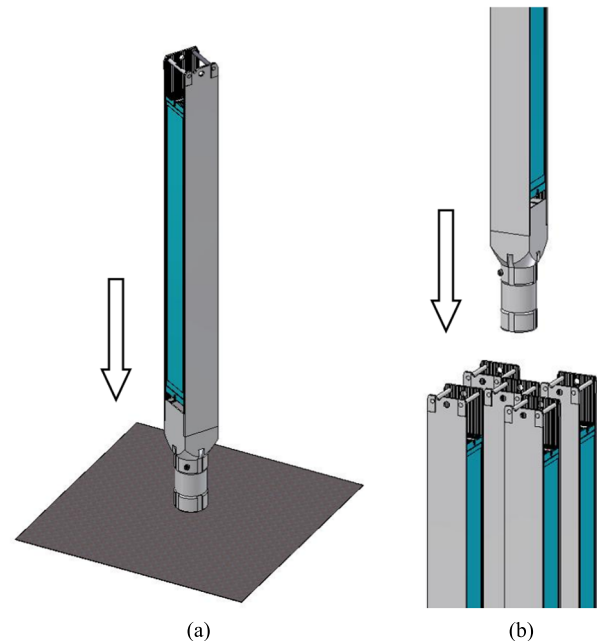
Drop Accident Cases: (a) Fuel Assembly Drop onto the Pool Bottom, and (b) Fuel Assembly Drop onto the Loaded Fuel Assembly Bundles
